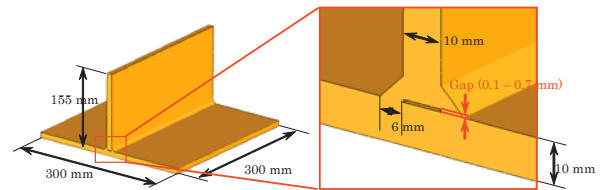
Fillet weld joint model with initial root gap.
